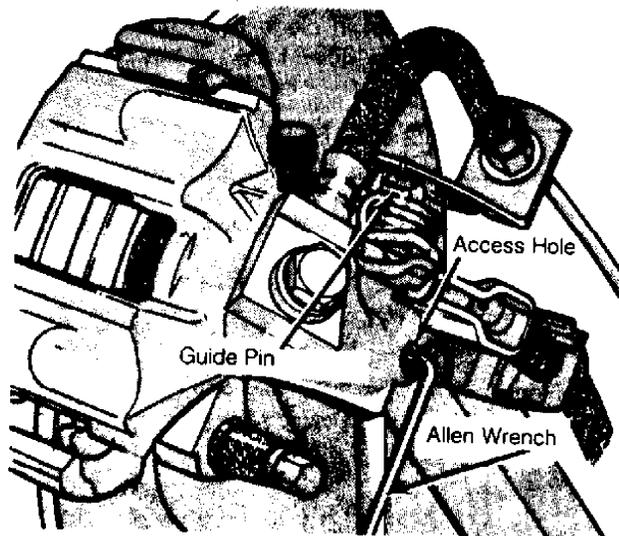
Rear Disc Brake Assembly (Daytona)
